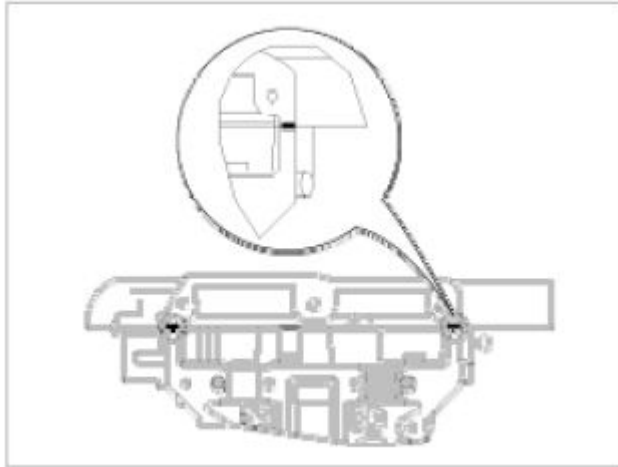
Identifying LH Cylinder Head Cover Sealant Applying Area
